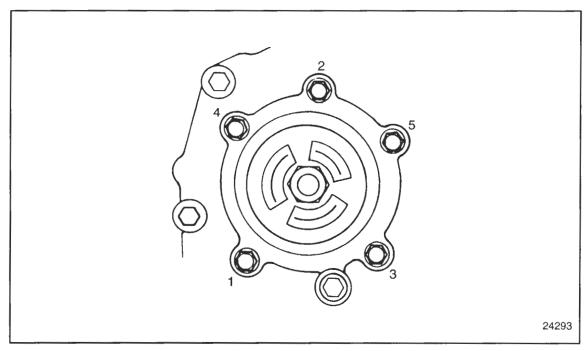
Accessory Drive Assembly Bolt Torque Sequence
